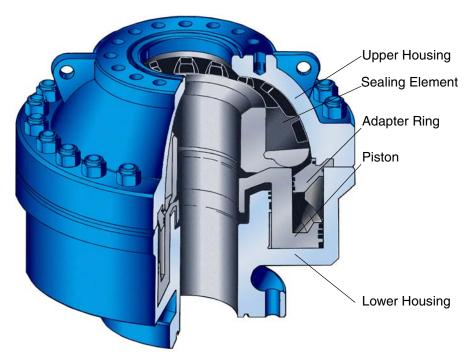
Hollow-Piston Bolted - Cover Spherical BOP
